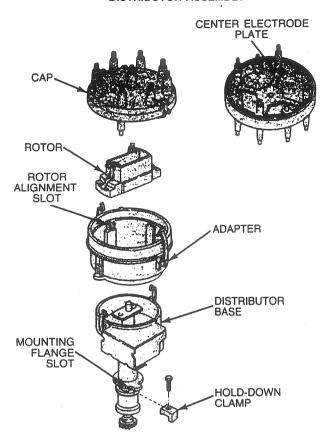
EEC-I distributor and cap. (Courtesy of Ford Motor Co.)
